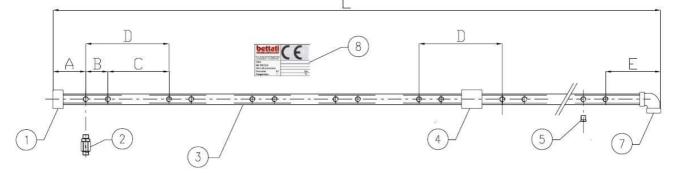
Manifolds for 140L cylinder rack, without directional valves
